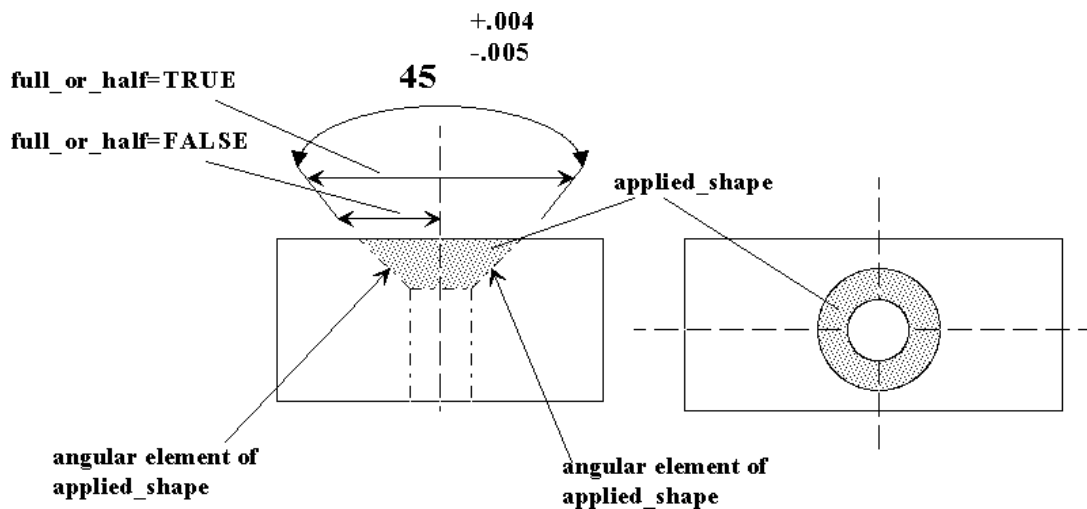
`Angular_size_dimension_tolerance`
